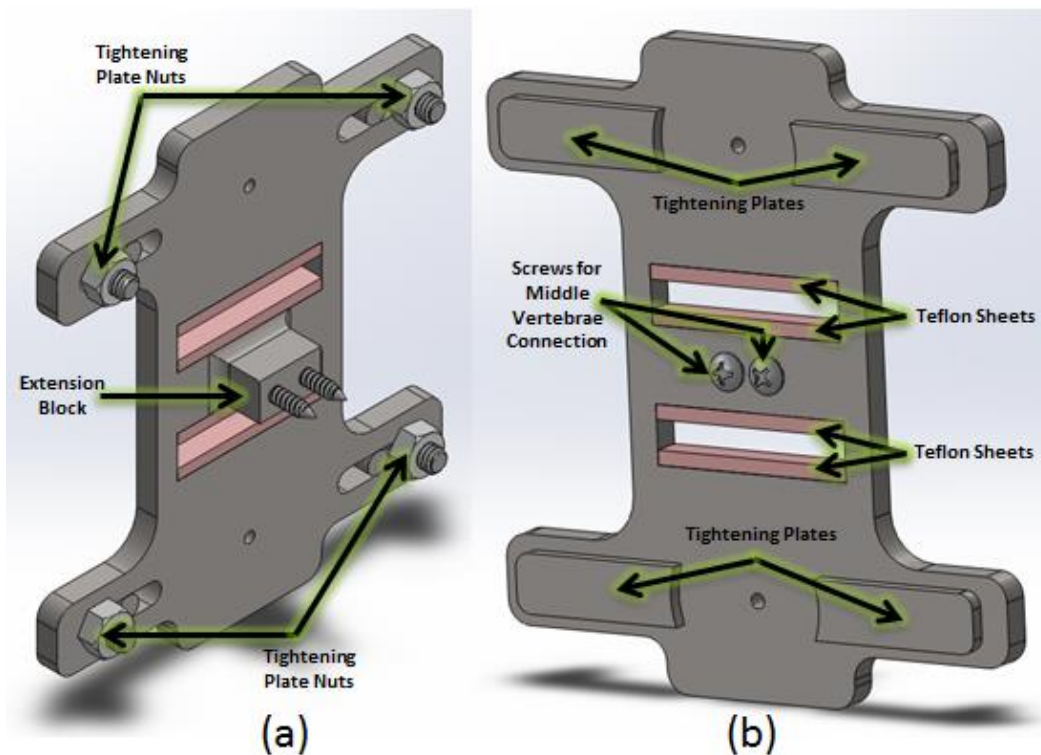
Anterior Fixture Front Plate – Part (a) is an isometric view of the front plate, with labels for the tightening plate nuts and extension block, while part (b) is a back side isometric view of the front plate, with labels for the tightening plates, screws for middle vertebrae connection, and teflon sheets. Note: it was found that Teflon sheets were unnecessary.
